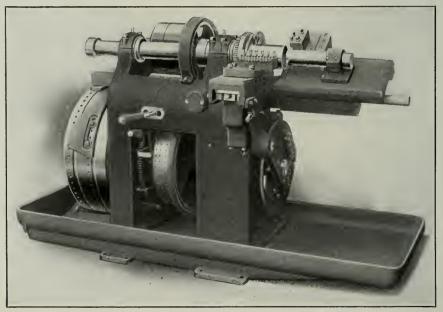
Gridley Semi-Automatic Piston Ring Machine
